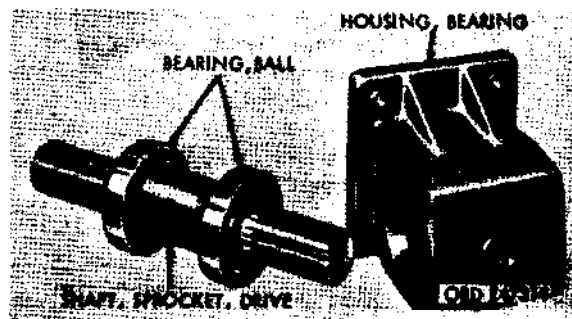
Removal of drive sprocket shaft and bearings from bearing housing
